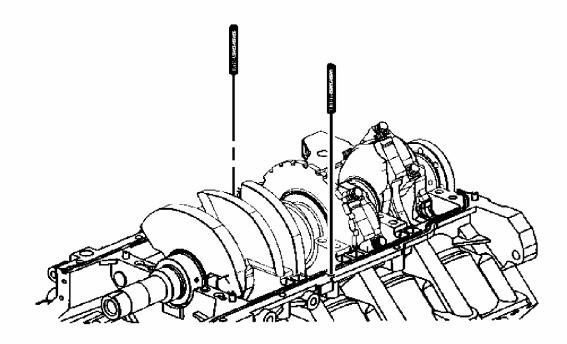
Identifying EN 46109 Guide Pins Courtesy of GENERAL MOTORS CORP.
